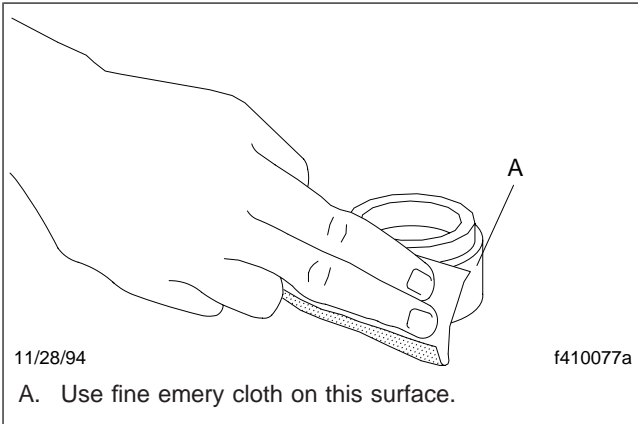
, Smoothing a Half-Round Yoke U-Joint Bearing Cup
